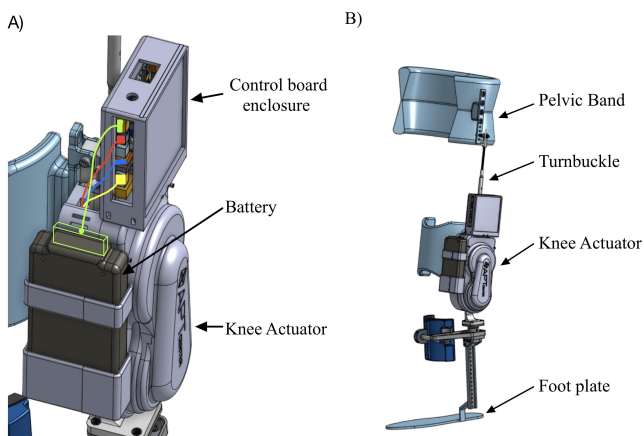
Model of components integrated with actuator a) close up of new elements b) view of full device
